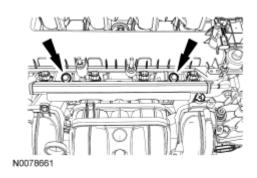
Locating Fuel Injectors And Bolts Courtesy of FORD MOTOR CO.
